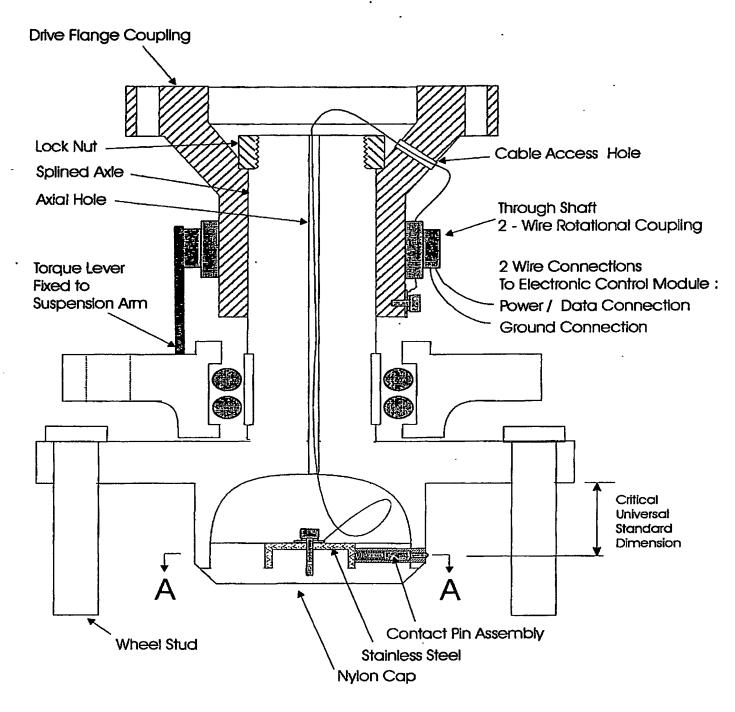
Wheel Hub Mating Arrangement For Drive Axle
